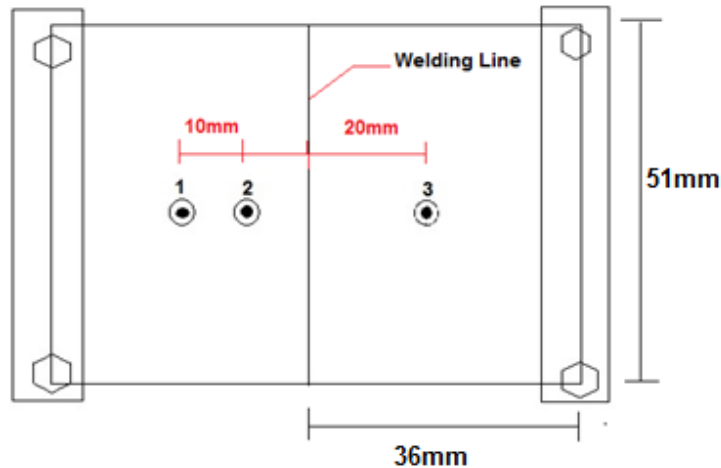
Welding scheme with thermocouple positions regarding the distance from the welding bead.
